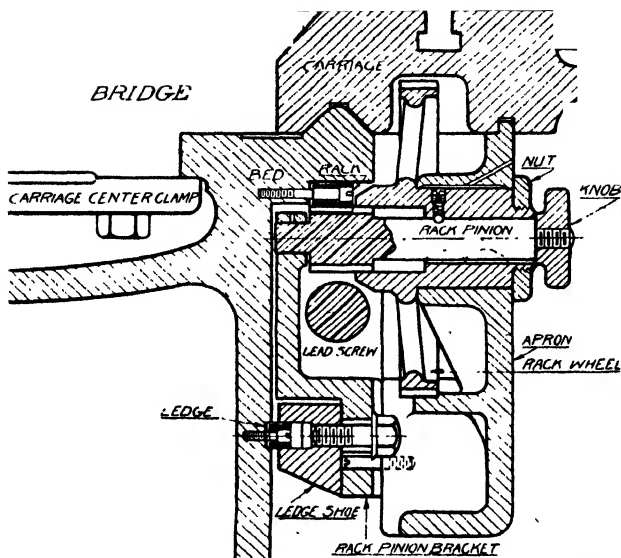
Part Section through Bed and Apron of a Lathe without Feed Shaft.
